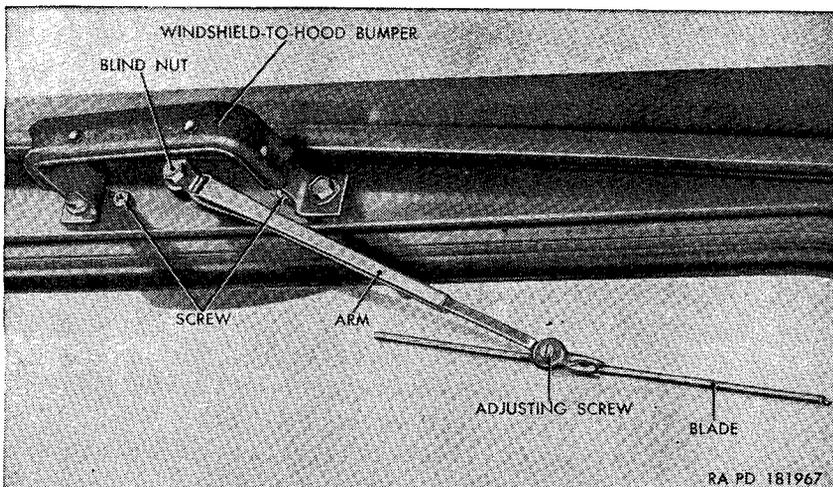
Windshield wiper blade and adjustable arm assemblies—installed.
